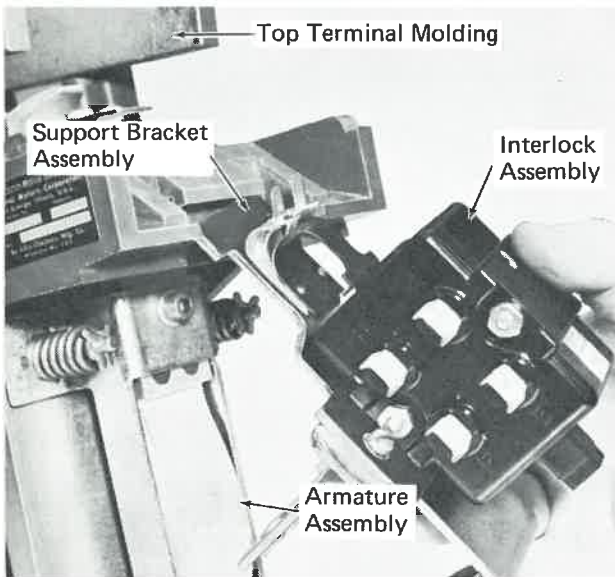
Removing Support Bracket And Interlock Assembly
